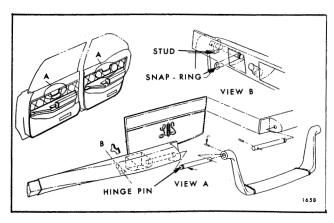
Door Pull Handle Assembly - 38669 Style
